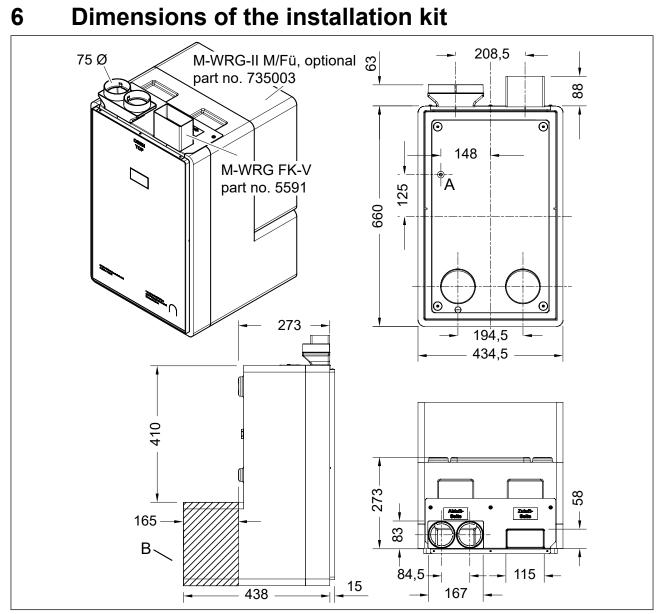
Dimensions of the installation kit with optional filler piece in millimetres
